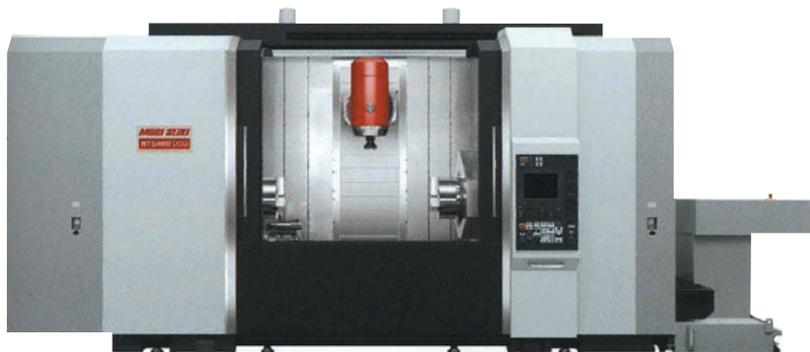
Survey of machining examples by combined multi-axis machine tools based on turning machines
